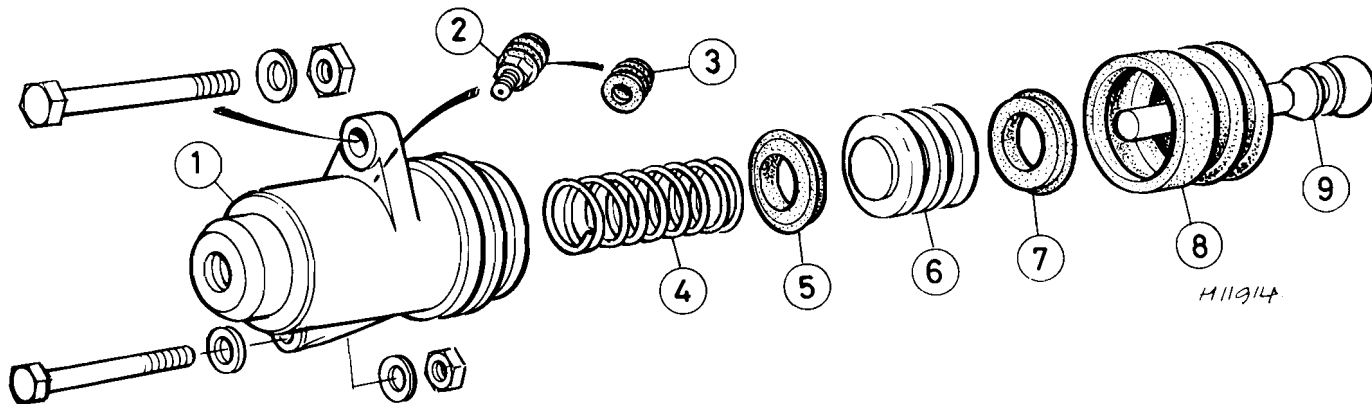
Exploded view of typical master cylinder (Sec 7)
